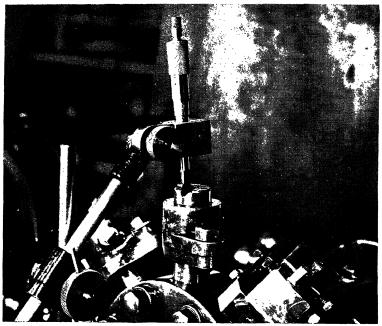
Accurate setup. Micrometer head used to set tools on the turret of an automatic machine. The use of such accurate devices in setting up the tools and checking the output of automatic machinery makes possible nationwide interchangeability of component parts. (Brown and Sharpe.)
